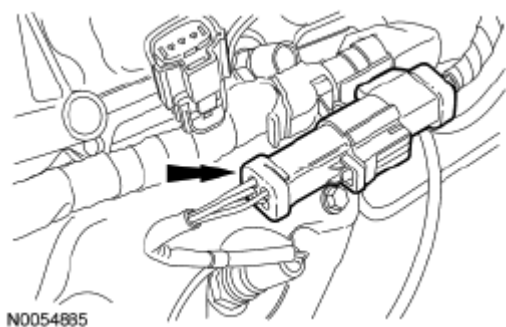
Locating LH Heated Oxygen Sensor (HO2S) Electrical Connector
